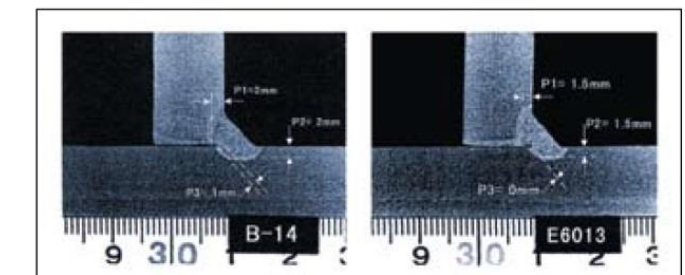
A comparison between B-14 and E6013 covered electrodes (4.0mm Ø, 175A) in fillet weld penetration; P1, P2 and P3 show sizes of penetration
